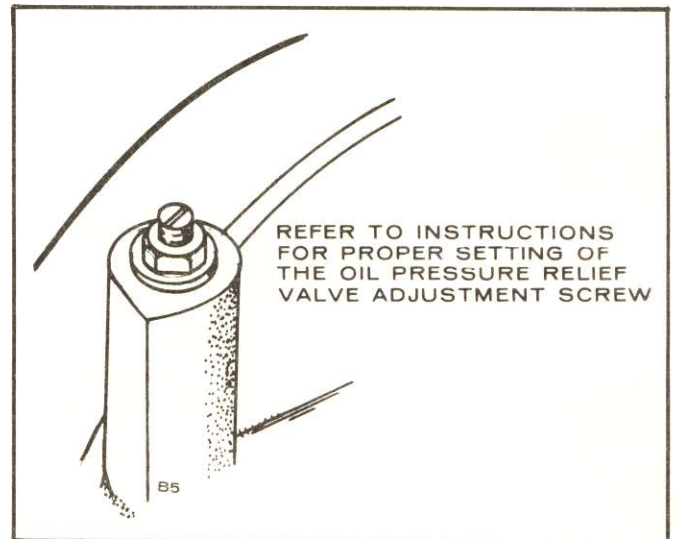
OIL PRESSURE RELIEF VALVE ADJUSTMENT
